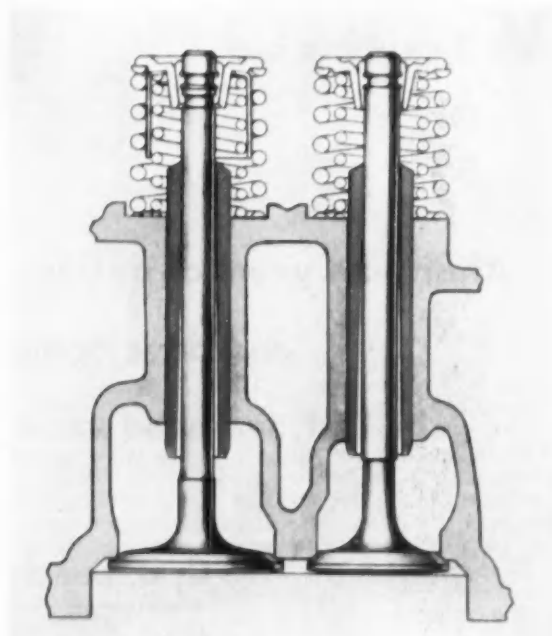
Tapered valve stem guides prevent oil from flowing down the intake valve guide under high vacuum conditions
